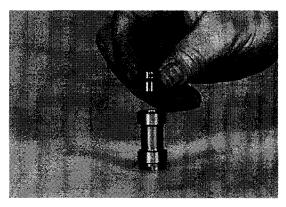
Position sleeve and ball assembly in regulator spool with check ball retainer pin up.
